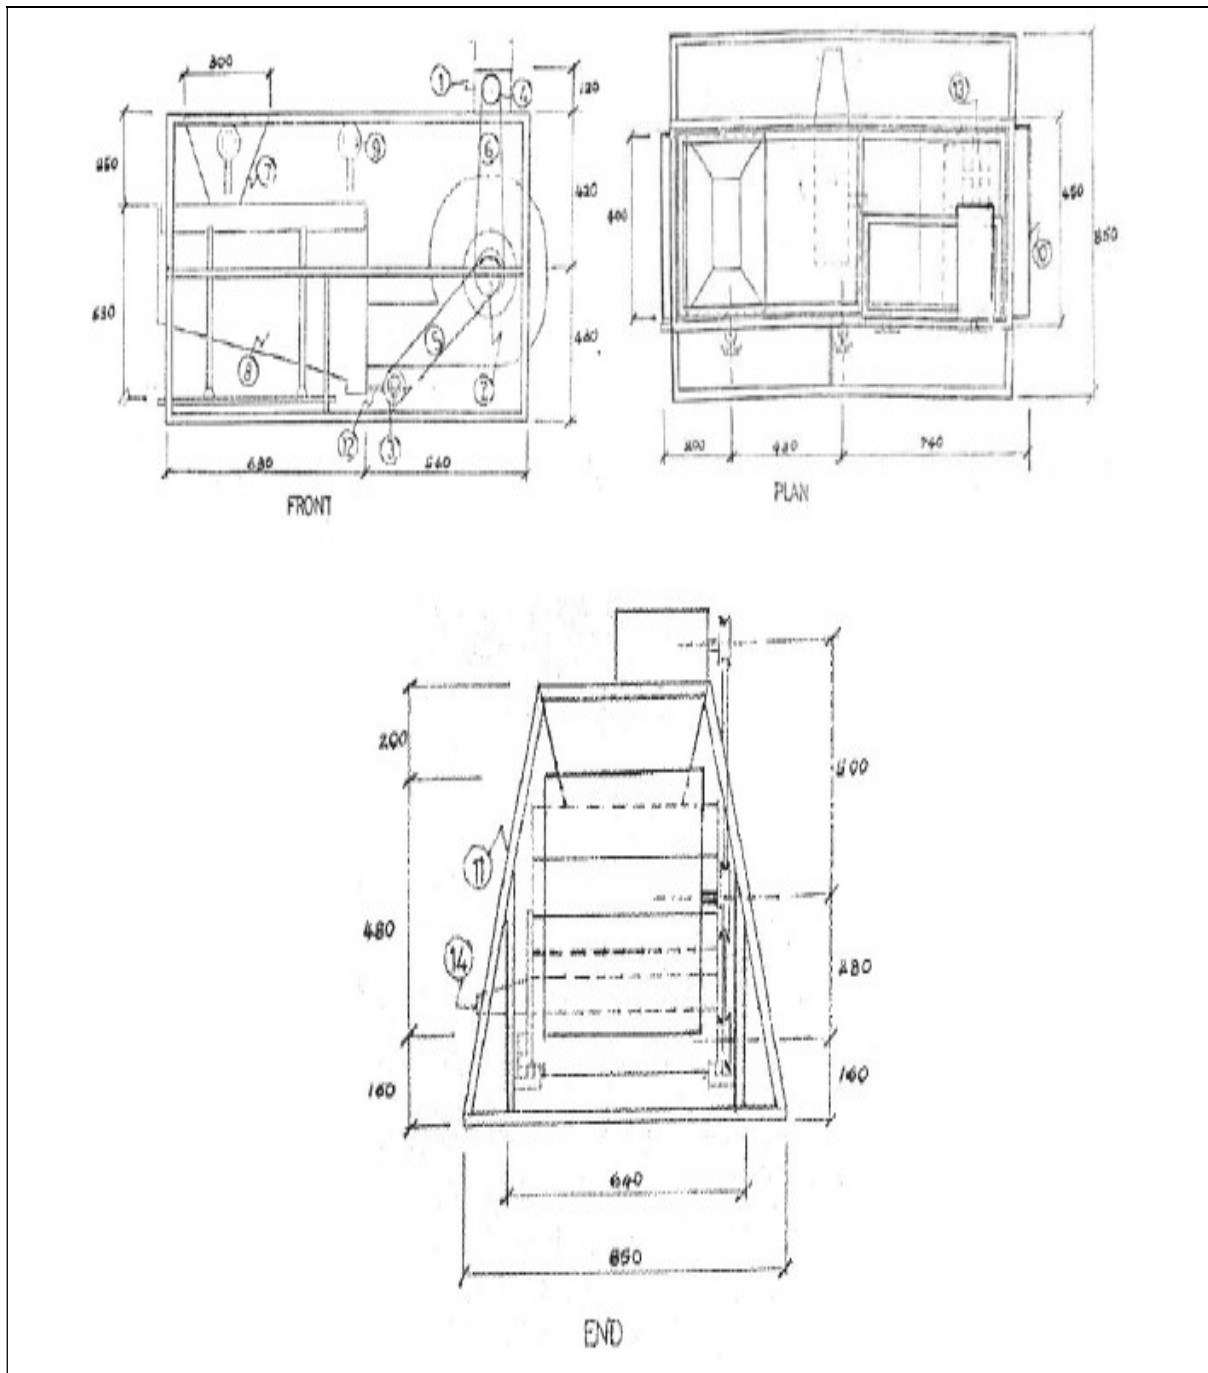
Detailed Assembly Drawing of the Winnowing Machine
